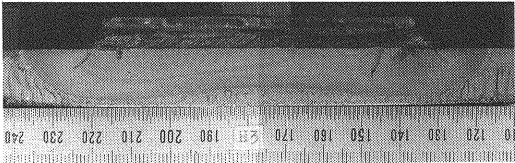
Fracture Surface of Toe Crack (A 3).
